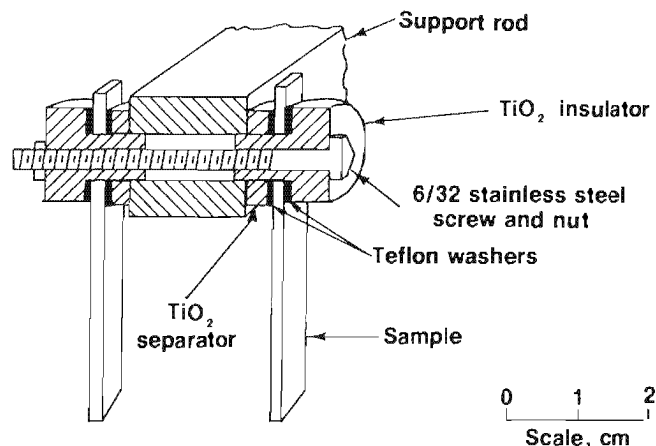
Weight-loss corrosion sample mounting assembly.
